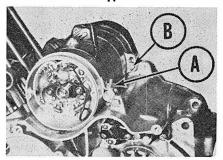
Alternator clamp nut (A) and lock screw (B) are accessible after removing air cleaner.
